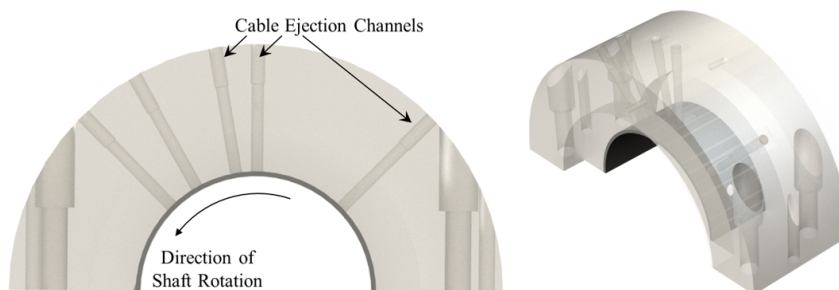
Schematic of bearing bush, with cable ejection channels indicated.
